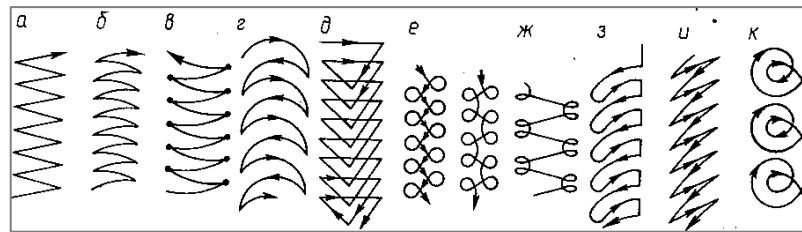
Types of movement of the electrode at the moment of welding
